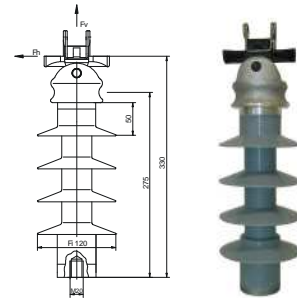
Technical drawing and photograph of composite line post insulator PKI 24 N/Sn with special spring clamp
